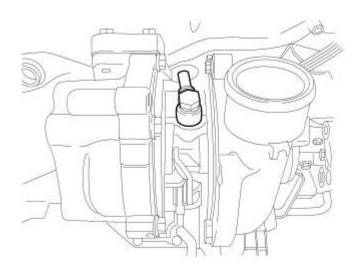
Turbocharger Support Bracket Bolts Courtesy of CHRYSLER LLC
